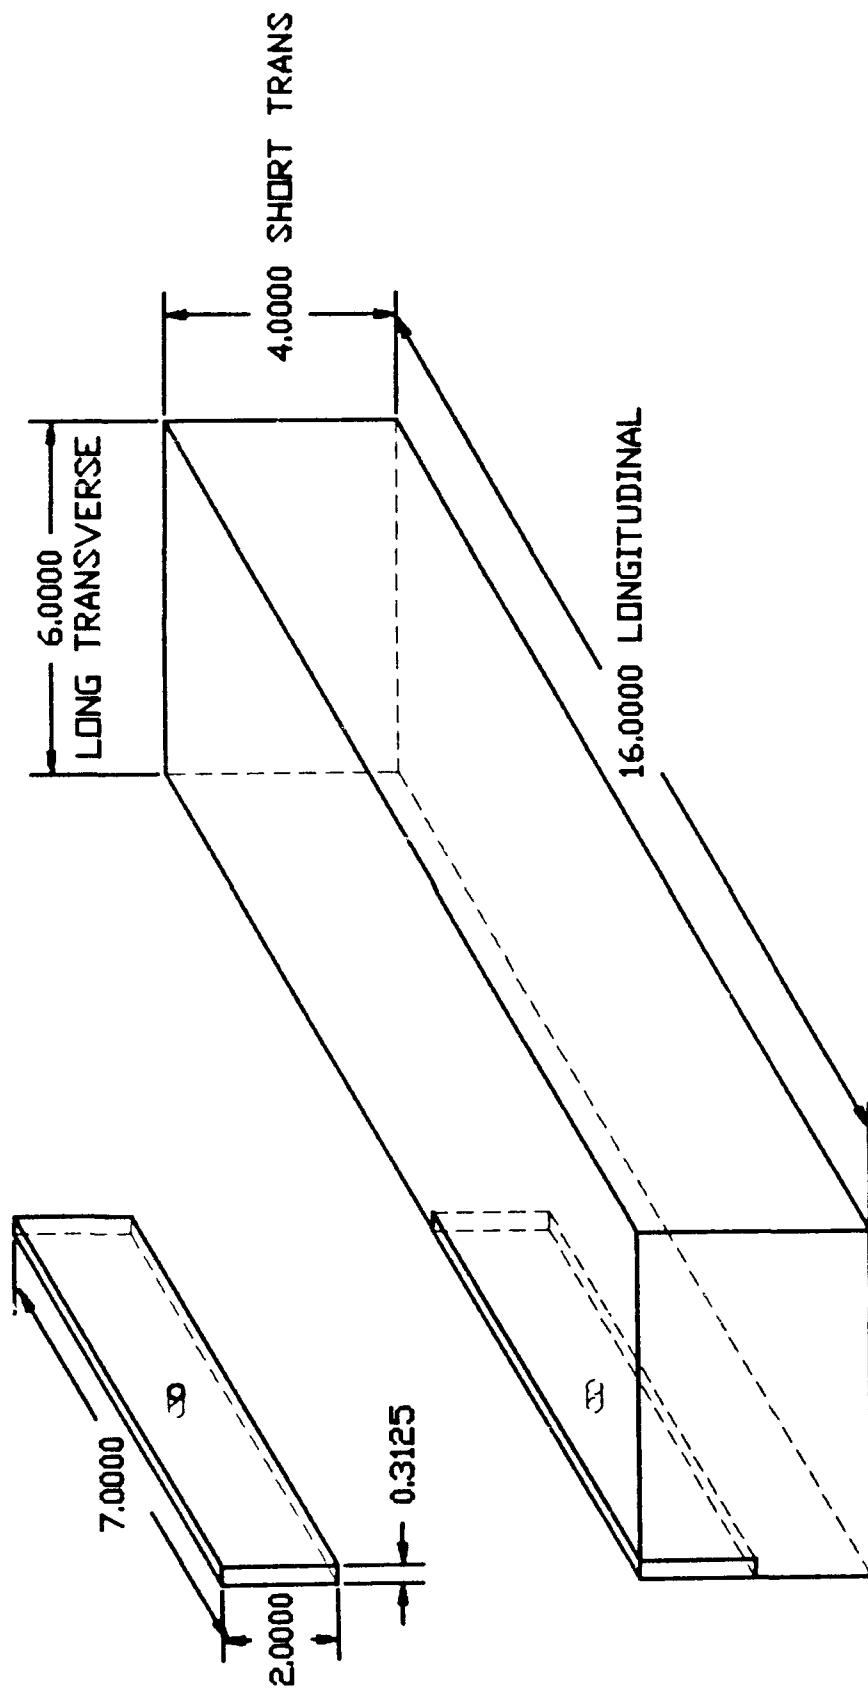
8090-TU51 4" Plate Fatigue Test Coupons
